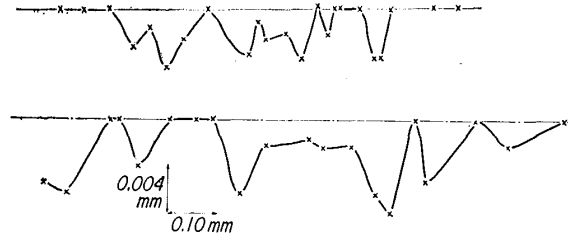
Roughness of cold rolled aluminium surface (Lubricated with palm oil).
